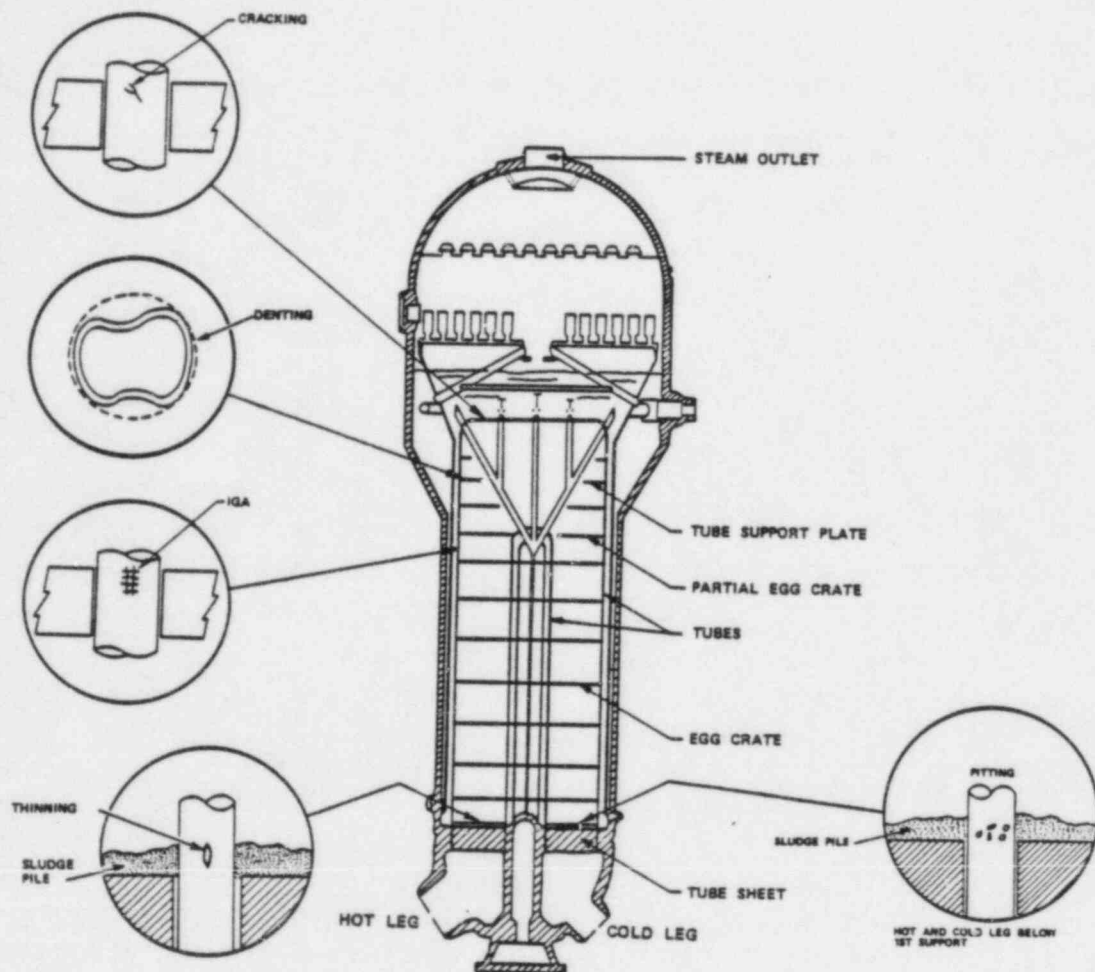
Summary of Tube Degradation Locations in Combustion Engineering Steam Generators
